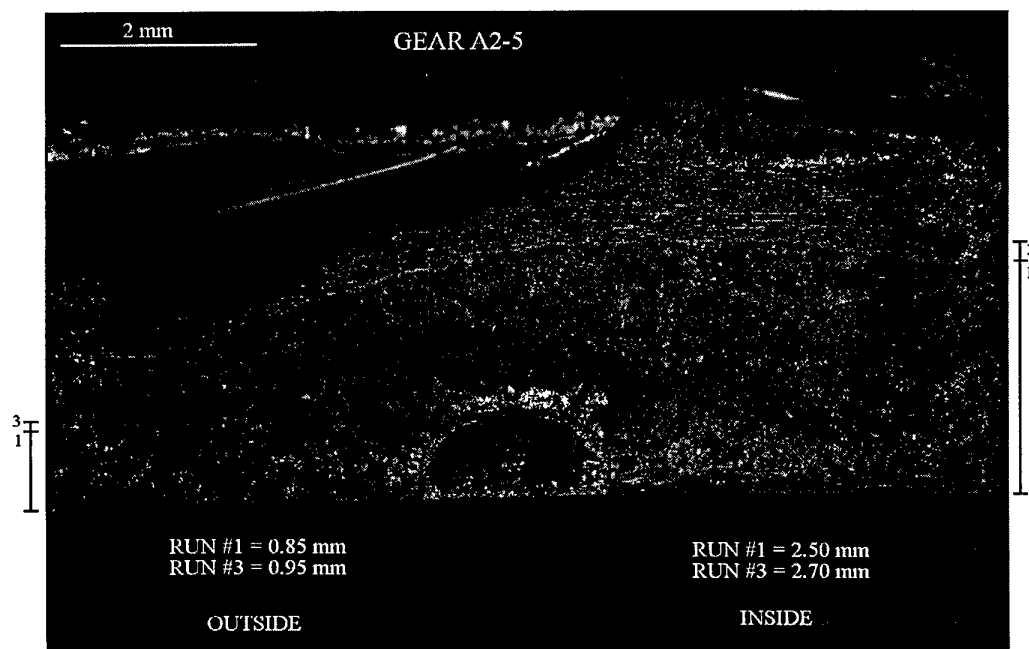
Fracture surface of Gear A2-5 with corresponding results of the Magnetic Rubber Inspection
